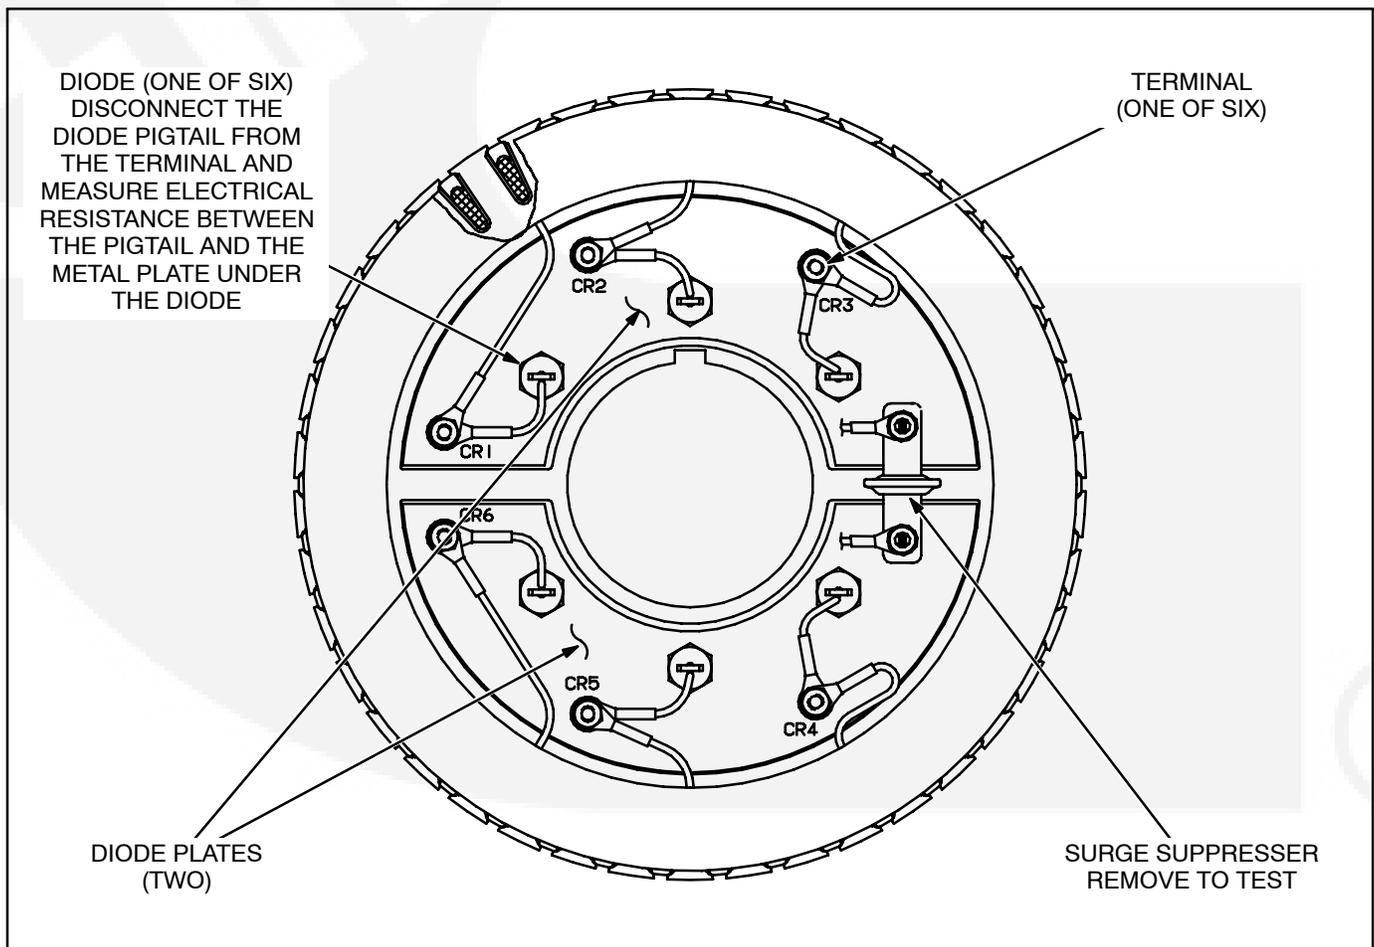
TESTING THE ROTATING RECTIFIER ASSEMBLY
